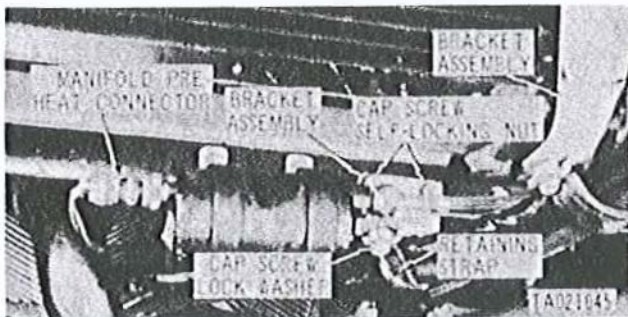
Removing or installing wiring harness and generator cable bracket assembly.
